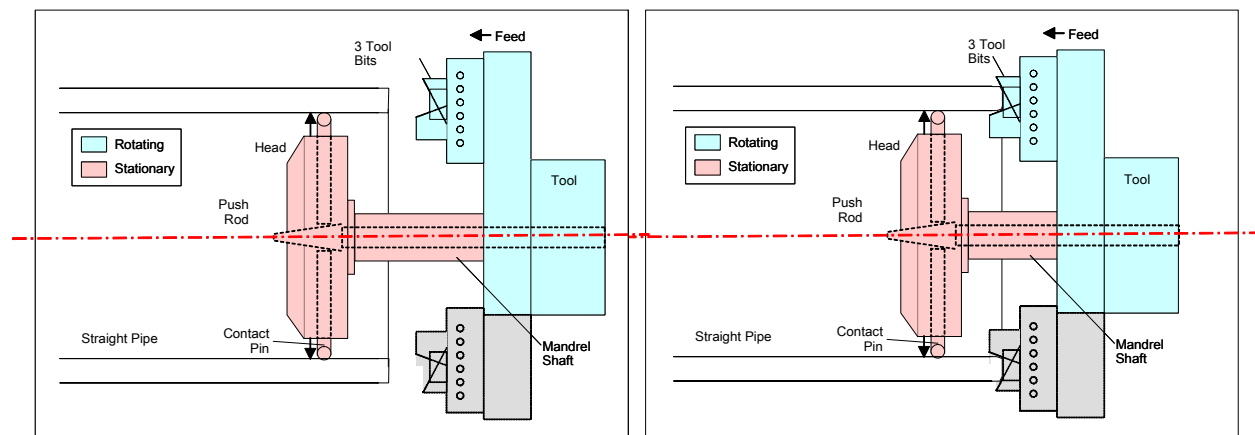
Illustration of operation of pipe edge bevelling machine. Shown are the tool fixtured in the pipe (left), then moved into machining position, where it bevels the outside diameter, and trims the inside diameter (right).
